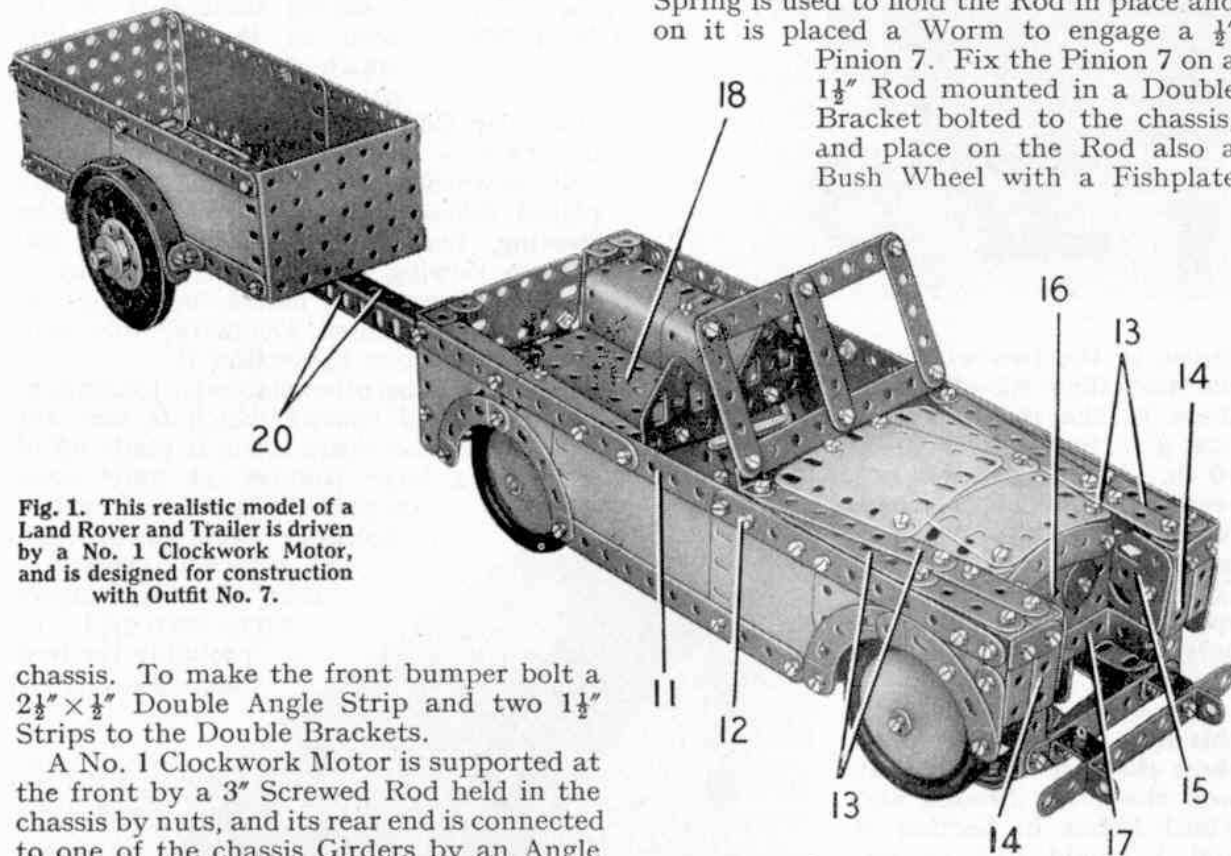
This realistic model of a Land Rover and Trailer is driven by a No. 1 Clockwork Motor, and is designed for construction with Outfit No. 7.
